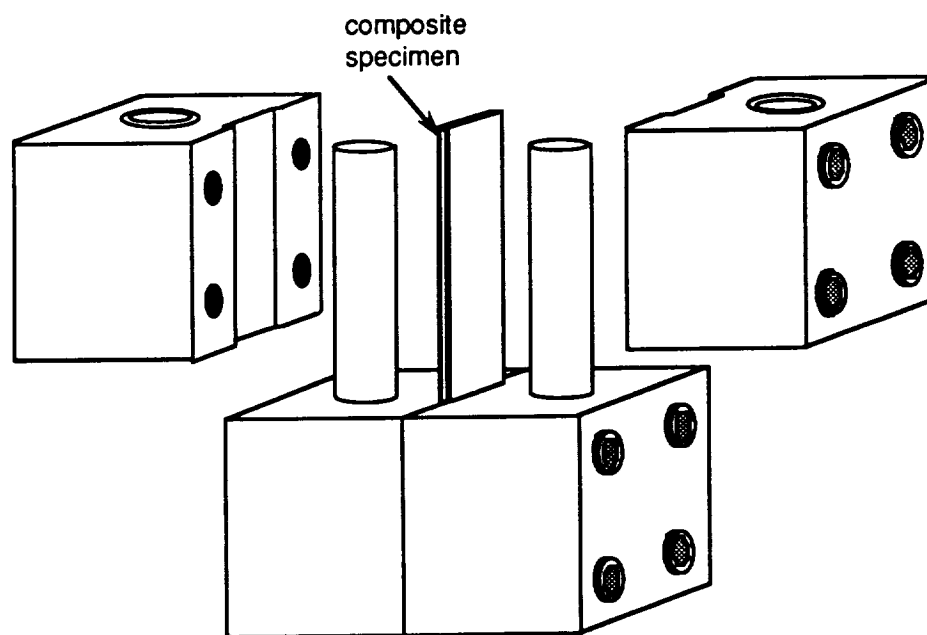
Wyoming End-Loaded, Side-Support compression test fixture
